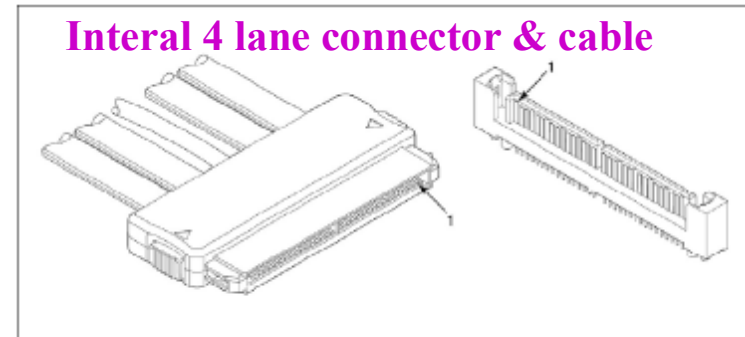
Isometric drawings of the internal 4 lane cable and connector
